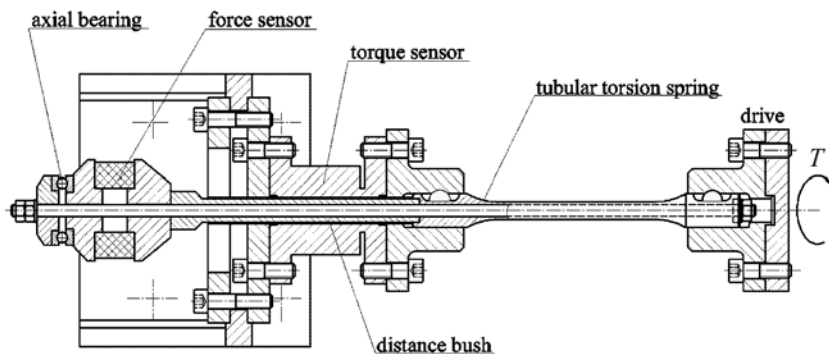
Clamping of a thin-walled tubular specimen during testing [12]
